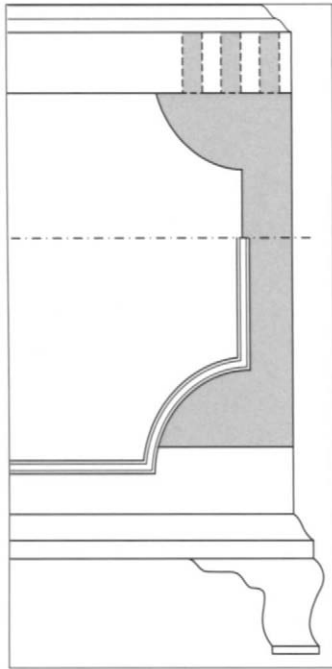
Detail showing triple-tenon construction in pedestal of John Townsend, tall clock, 1789 (cat. no. 21)
